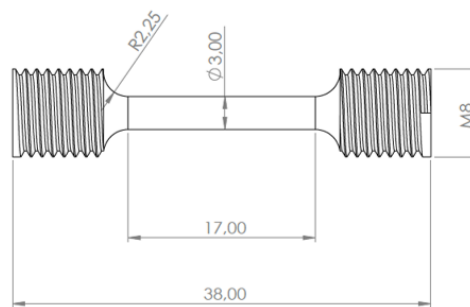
Schematic of tensile specimens dimensions (in mm)
